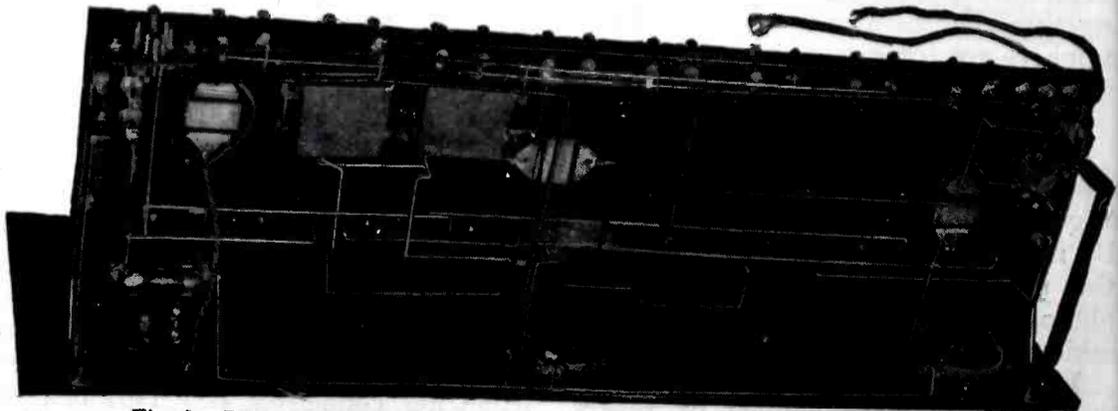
Bottom view of sub-panel, showing wiring and location of apparatus.
